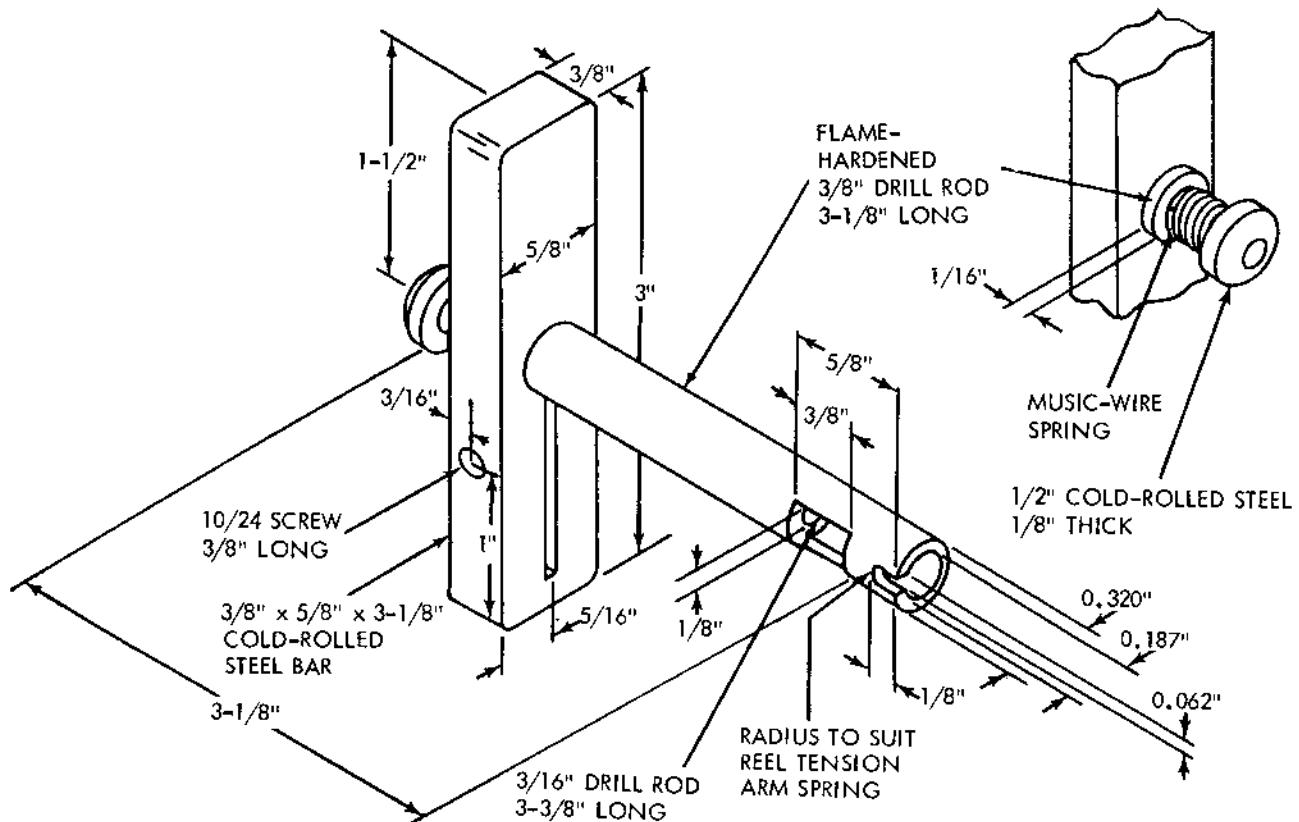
Spring Loading Tool (Tool No. T-38001-M)
